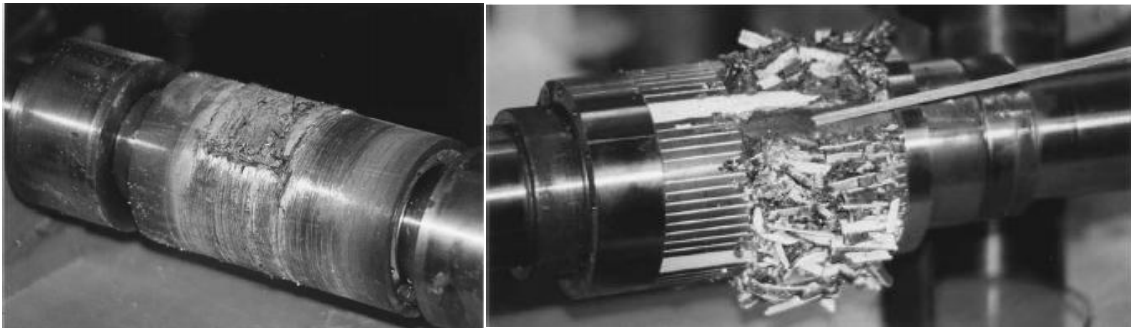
Rotor damage due to the mechanical design failure [42]
